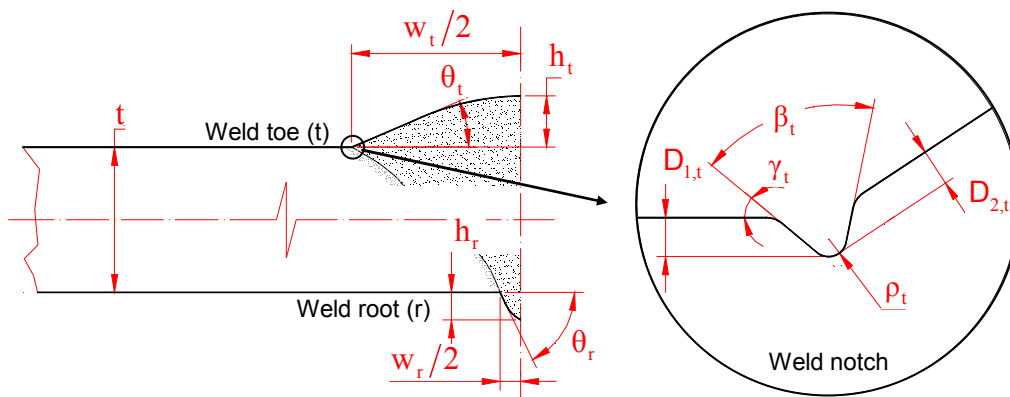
Dimensions of the weld and weld notch: weld width w , weld height h , weld flank angle θ , notch depth D , notch flank angle γ , notch opening angle β , and notch root radius ρ .
